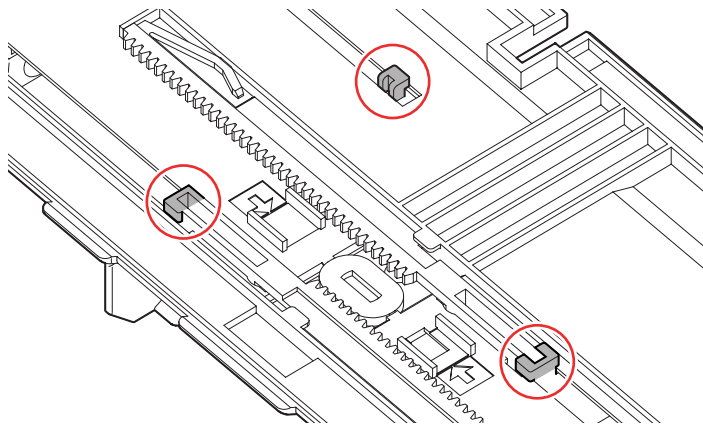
Reinstallation of MOUNTING PLATE ASSY., PINION
